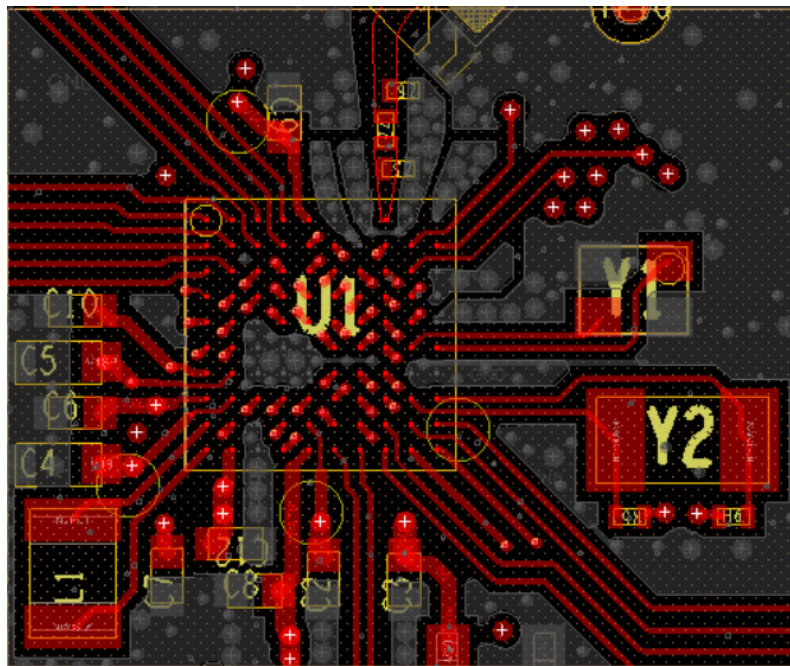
VFBGA100 PCB Layout, L1, Top Side
